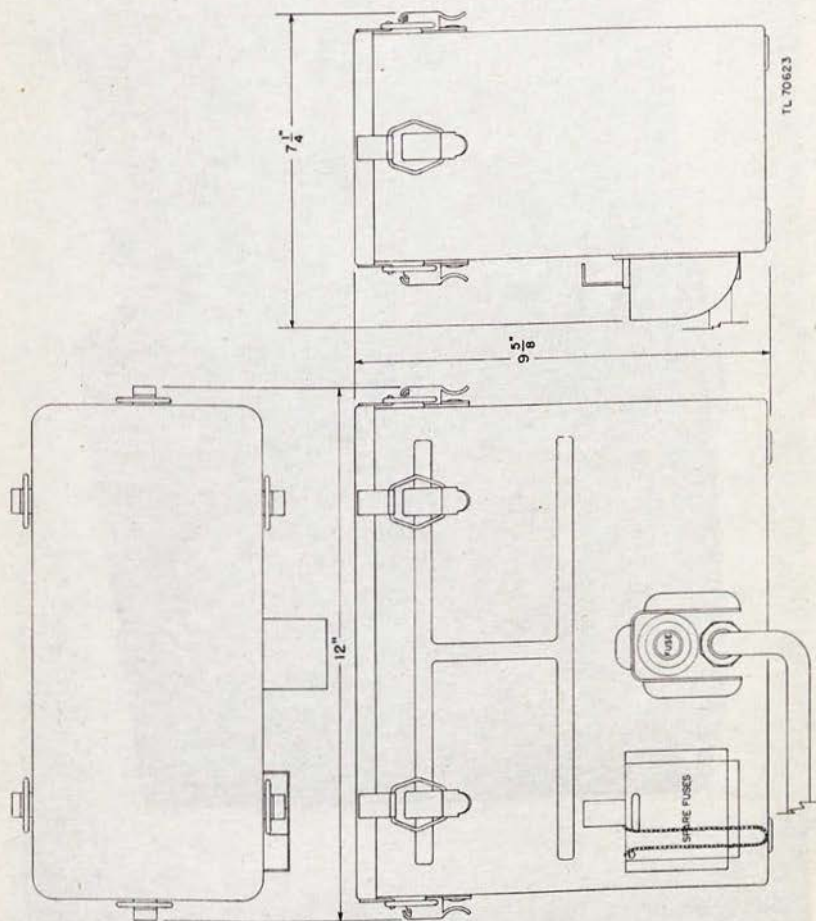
Vibrator Power Supply PP-114/VRC-3, outline dimensional drawing.
